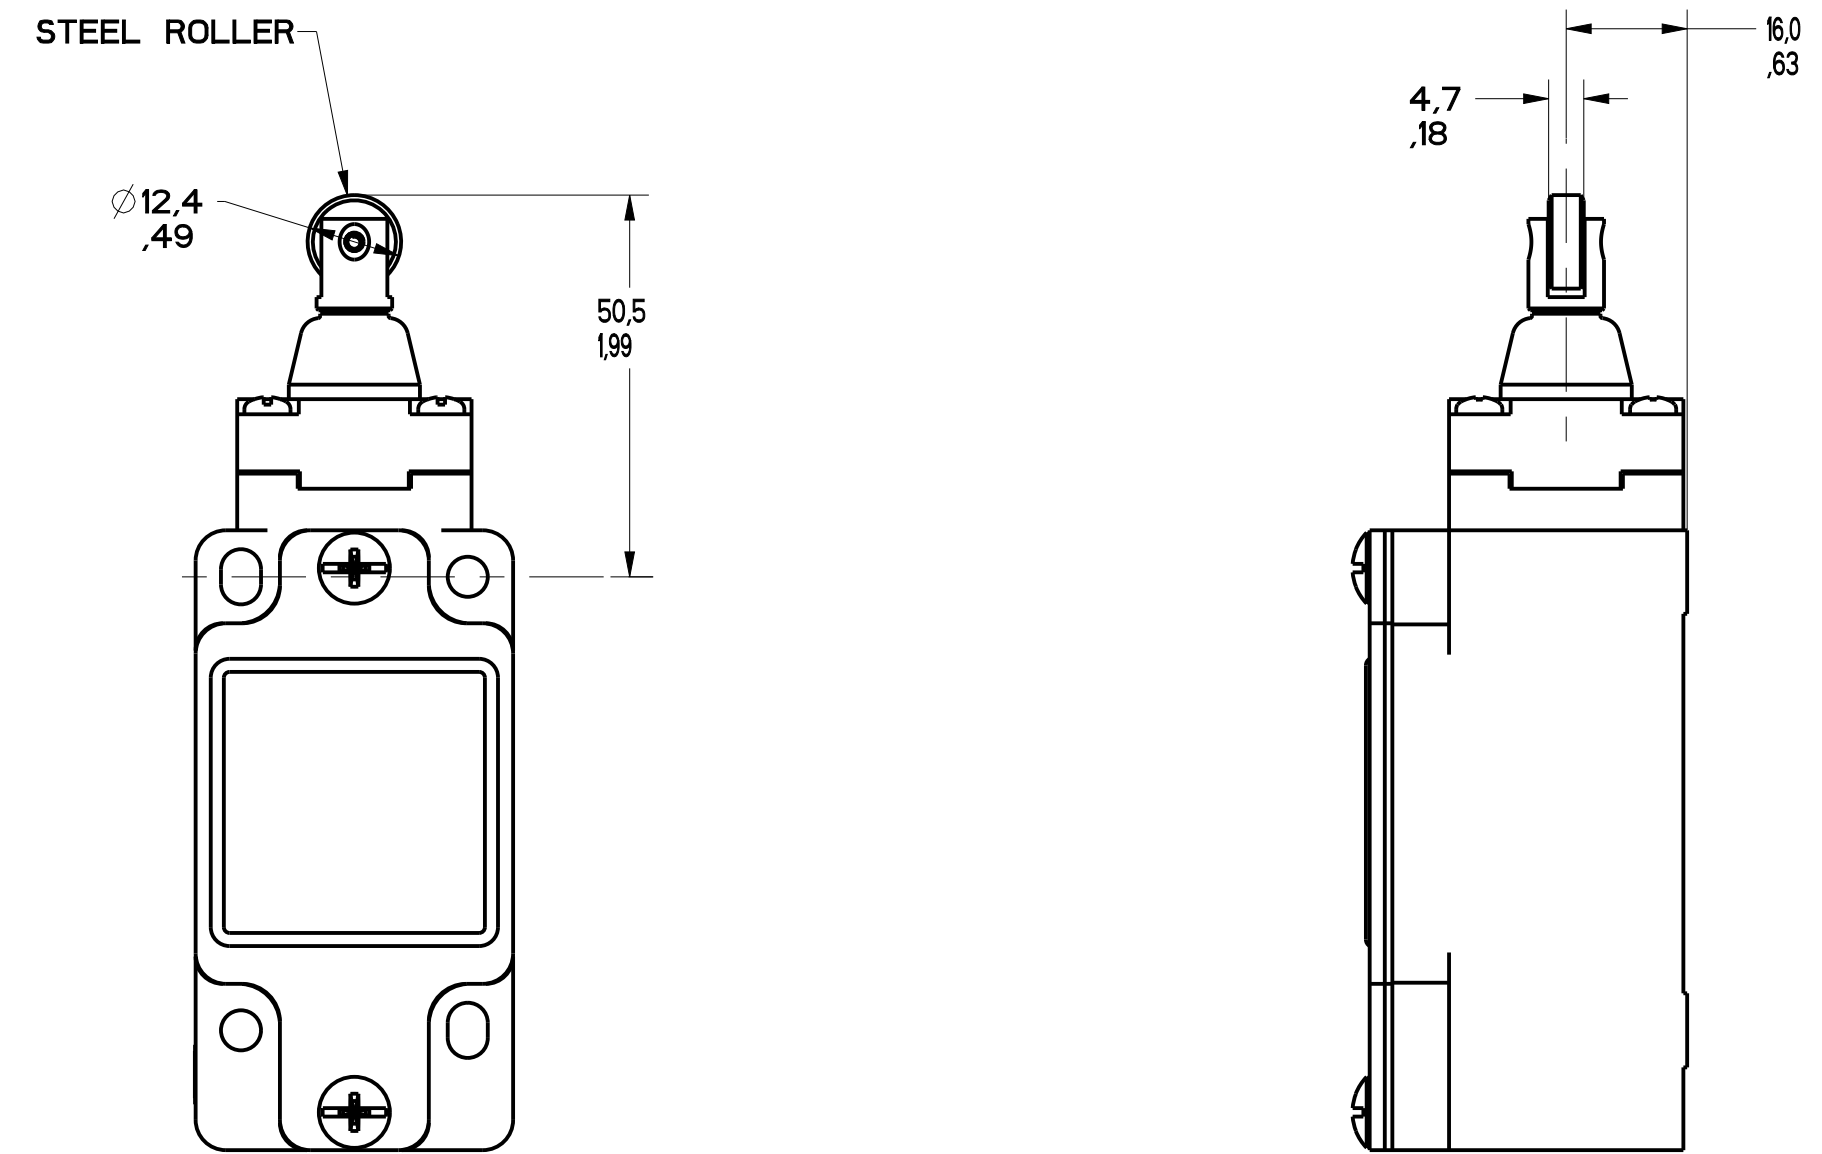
TOP ROLLER PLUNGER HEAD
